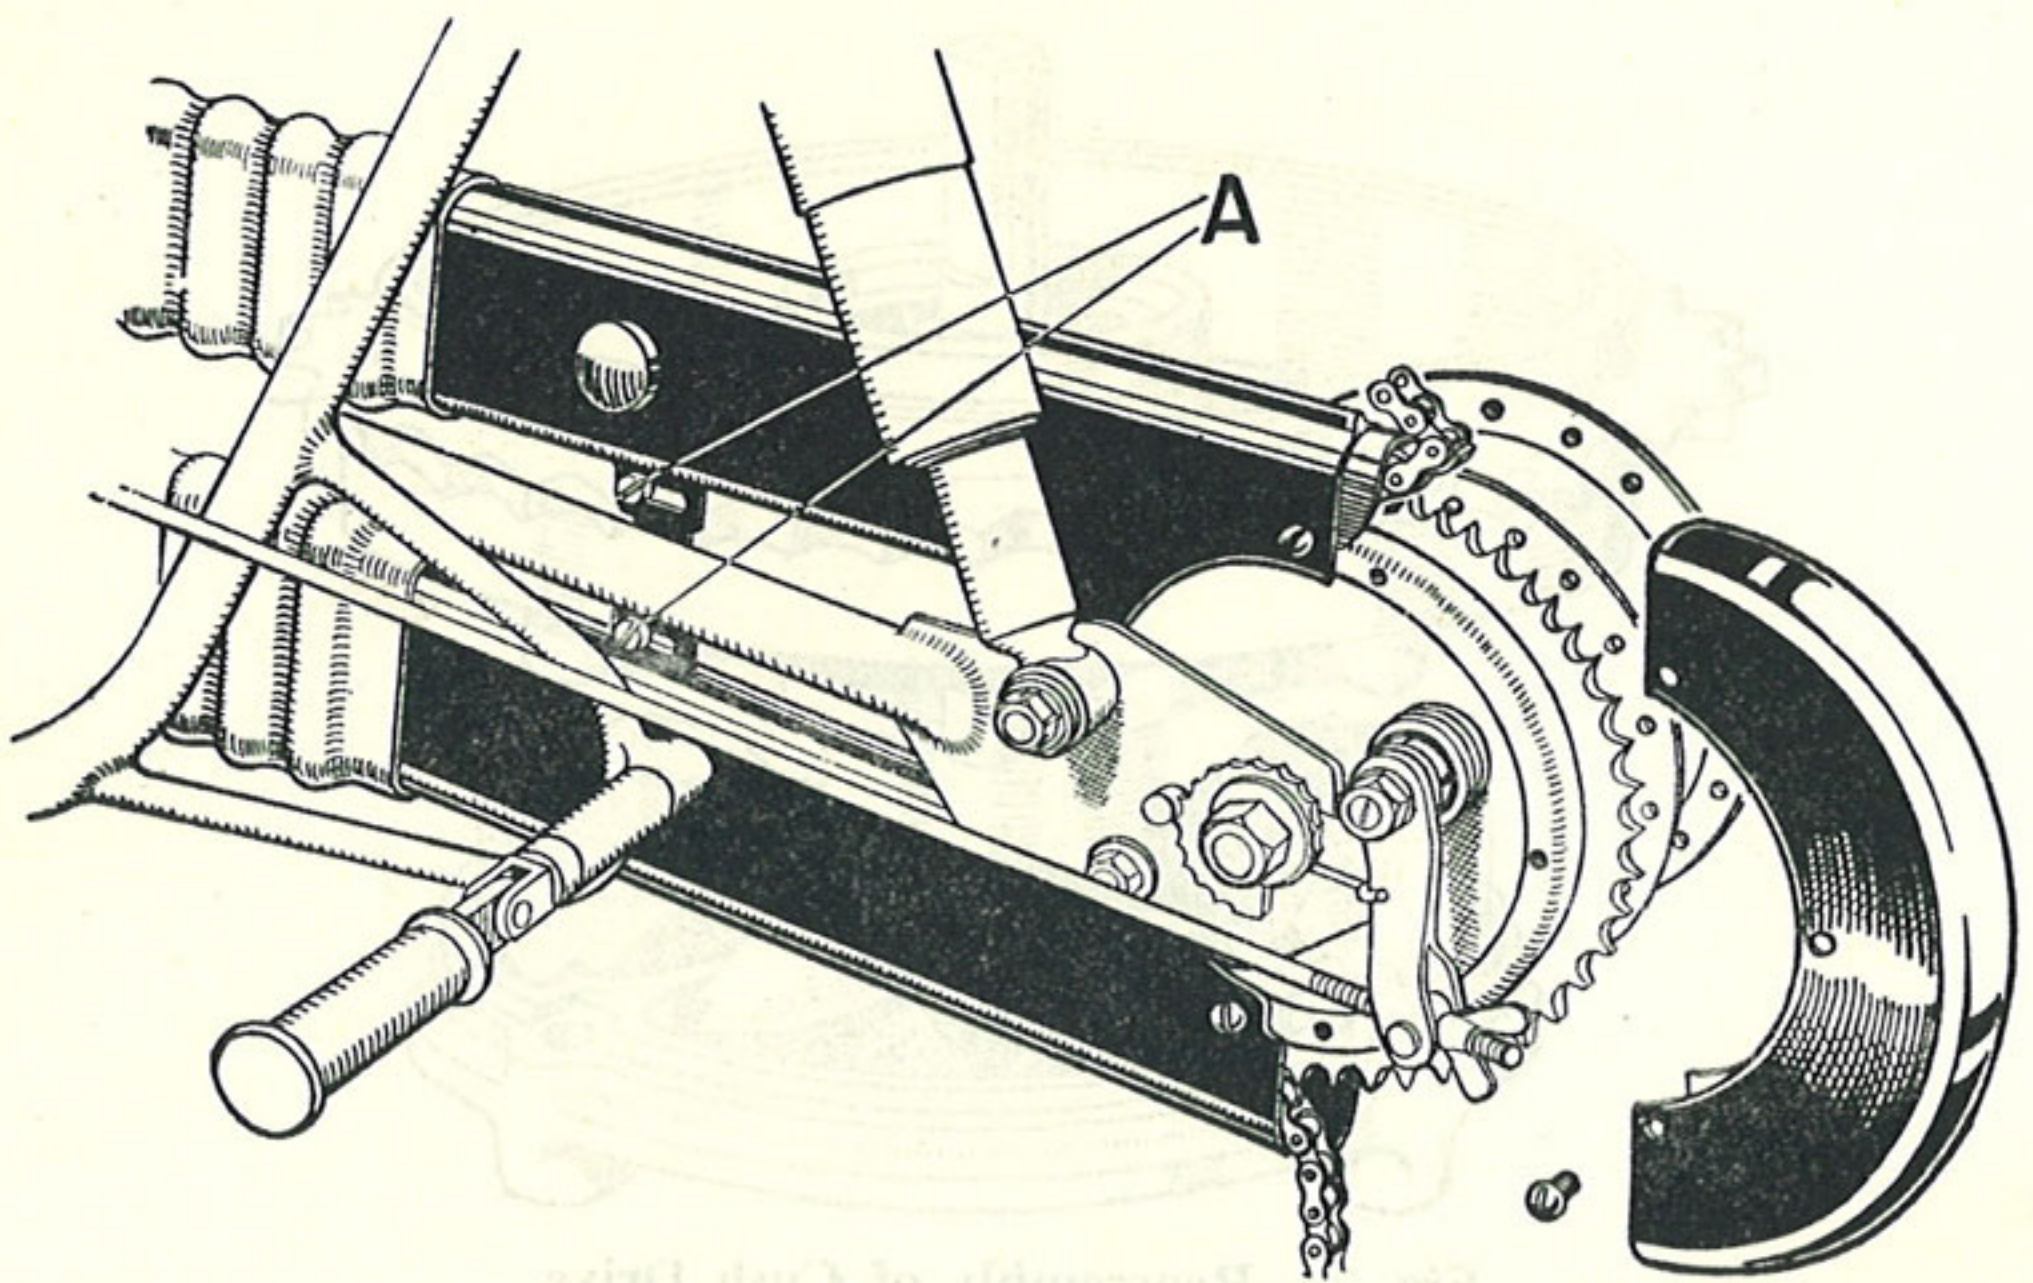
Rear Wheel Adjustment, showing movement of “Crusader” Rear Chaincase and detachable part of Chaincase “exploded”.
